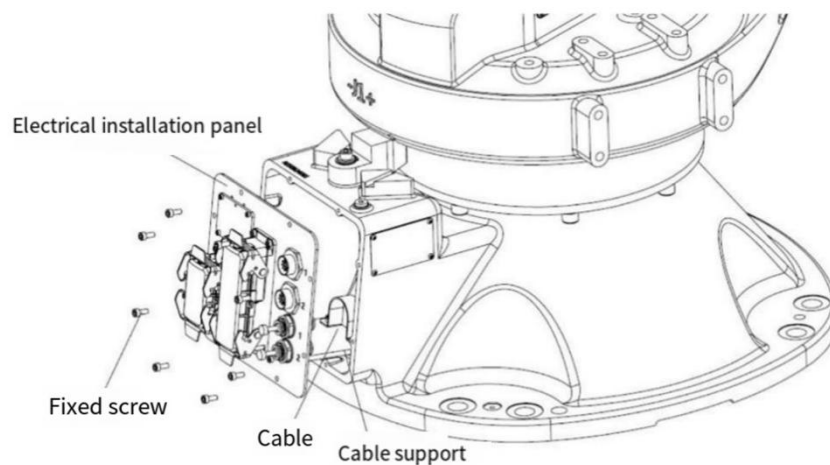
Internal cable layout of the RX3-A650-2260/RX3-A680-2260/RX3-A635-2700/RX3-A620-3100 bases
